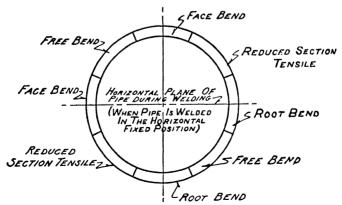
Order of Removal of test specimens from Welded Pipe (for pipe %" thick)
